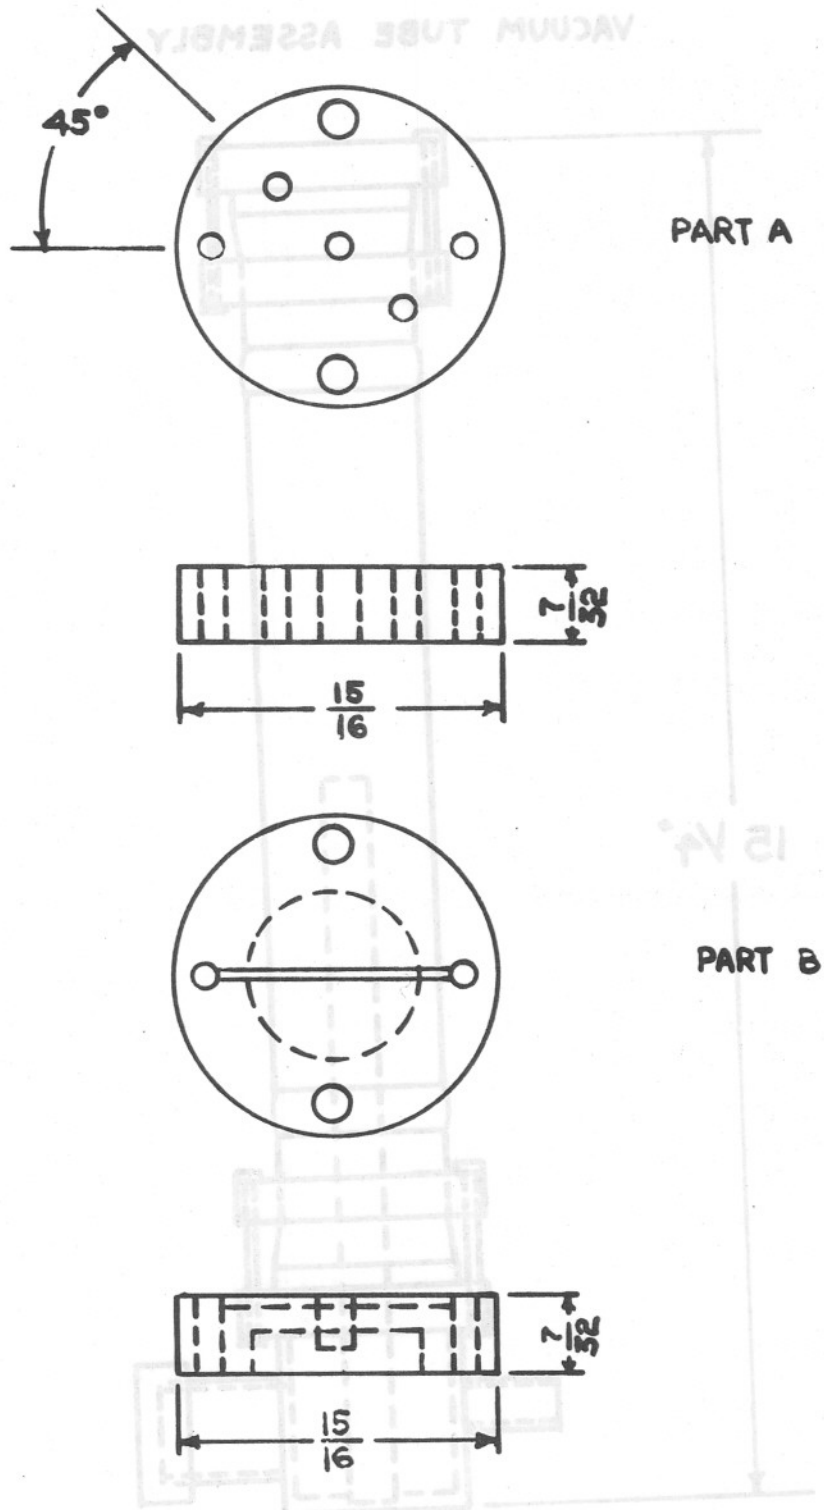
High temperature dielectric measuring setup - sample holder, parts A and B.
